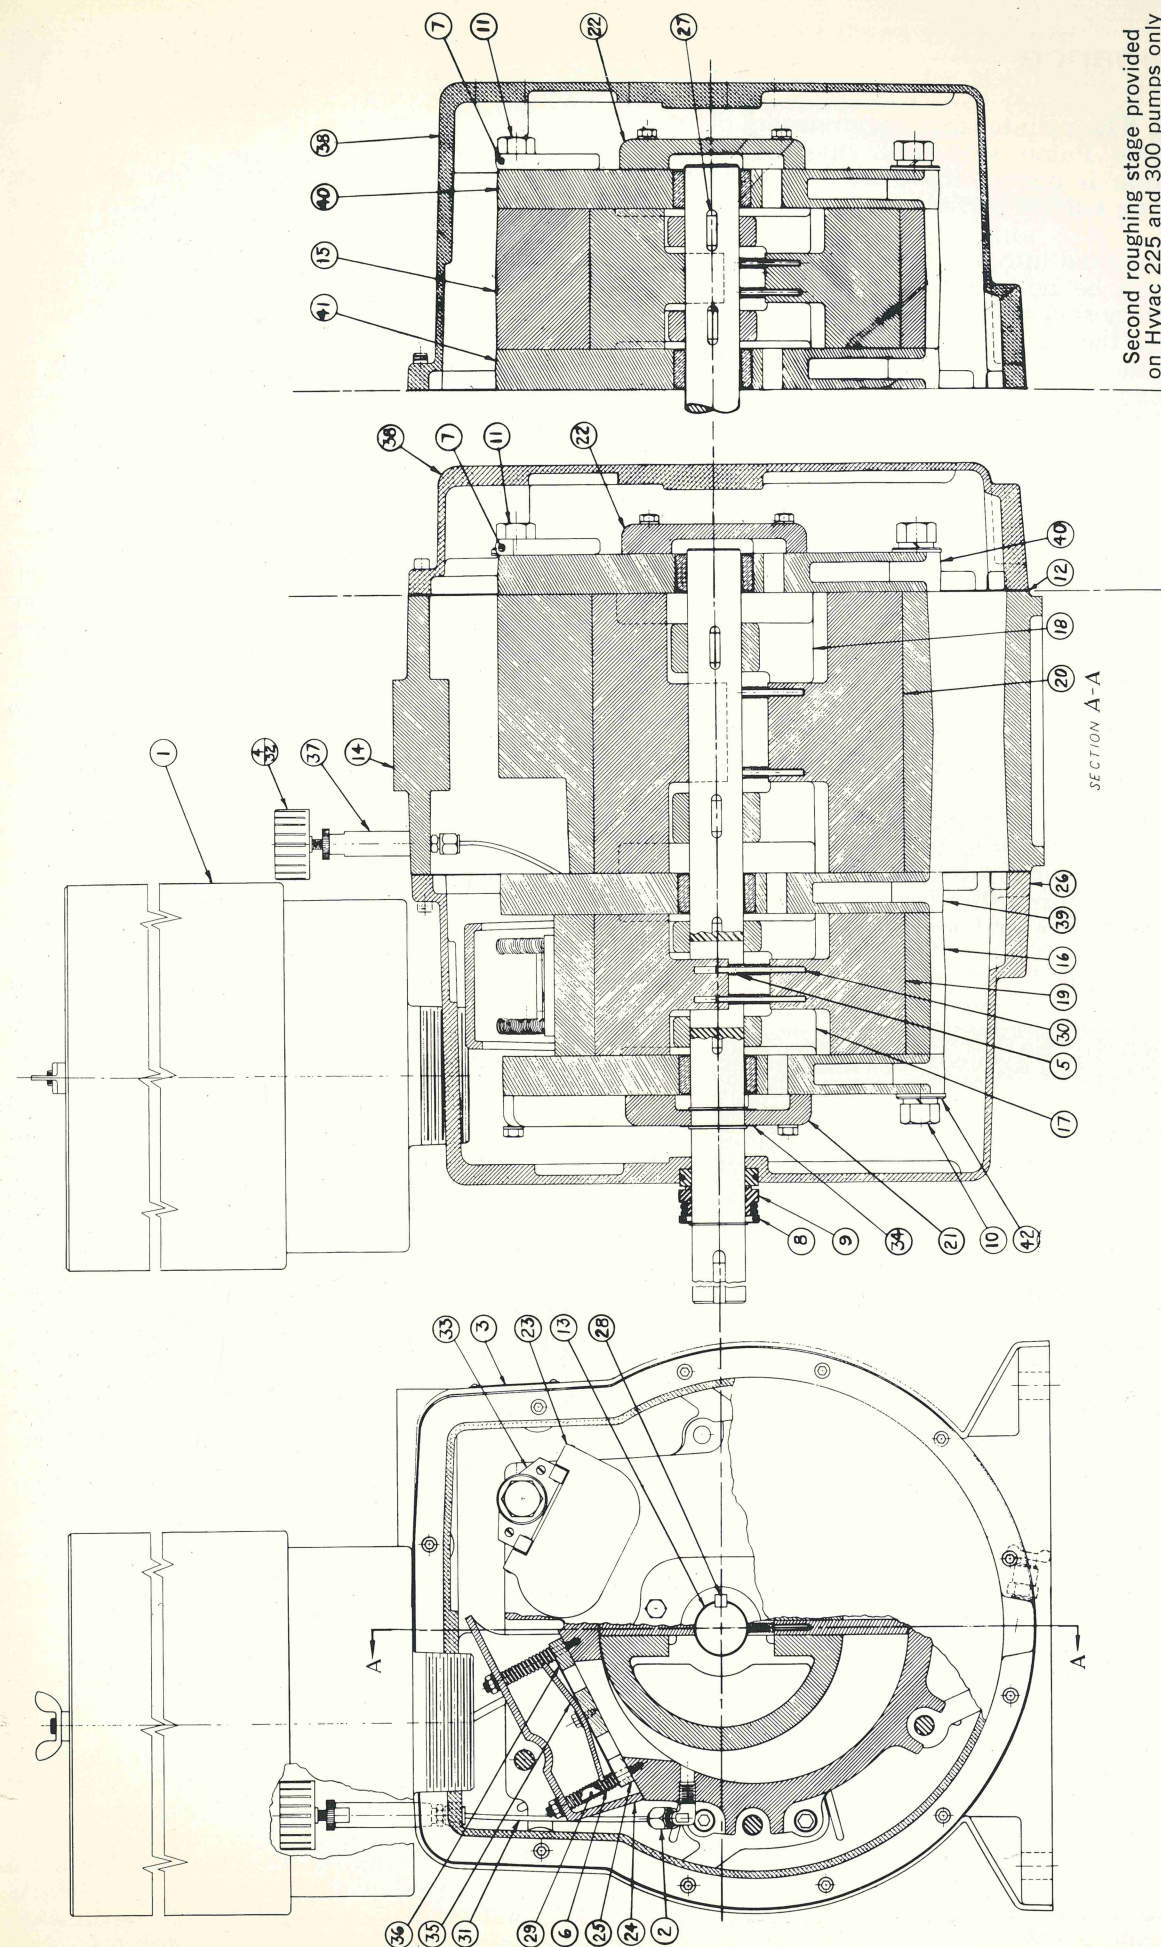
Sectional view of the Hyvac 150, 225, and 300 pumps
